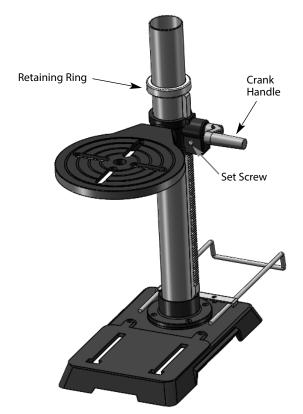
Attach retaining ring, crank handle and locking handle 9680341C.
